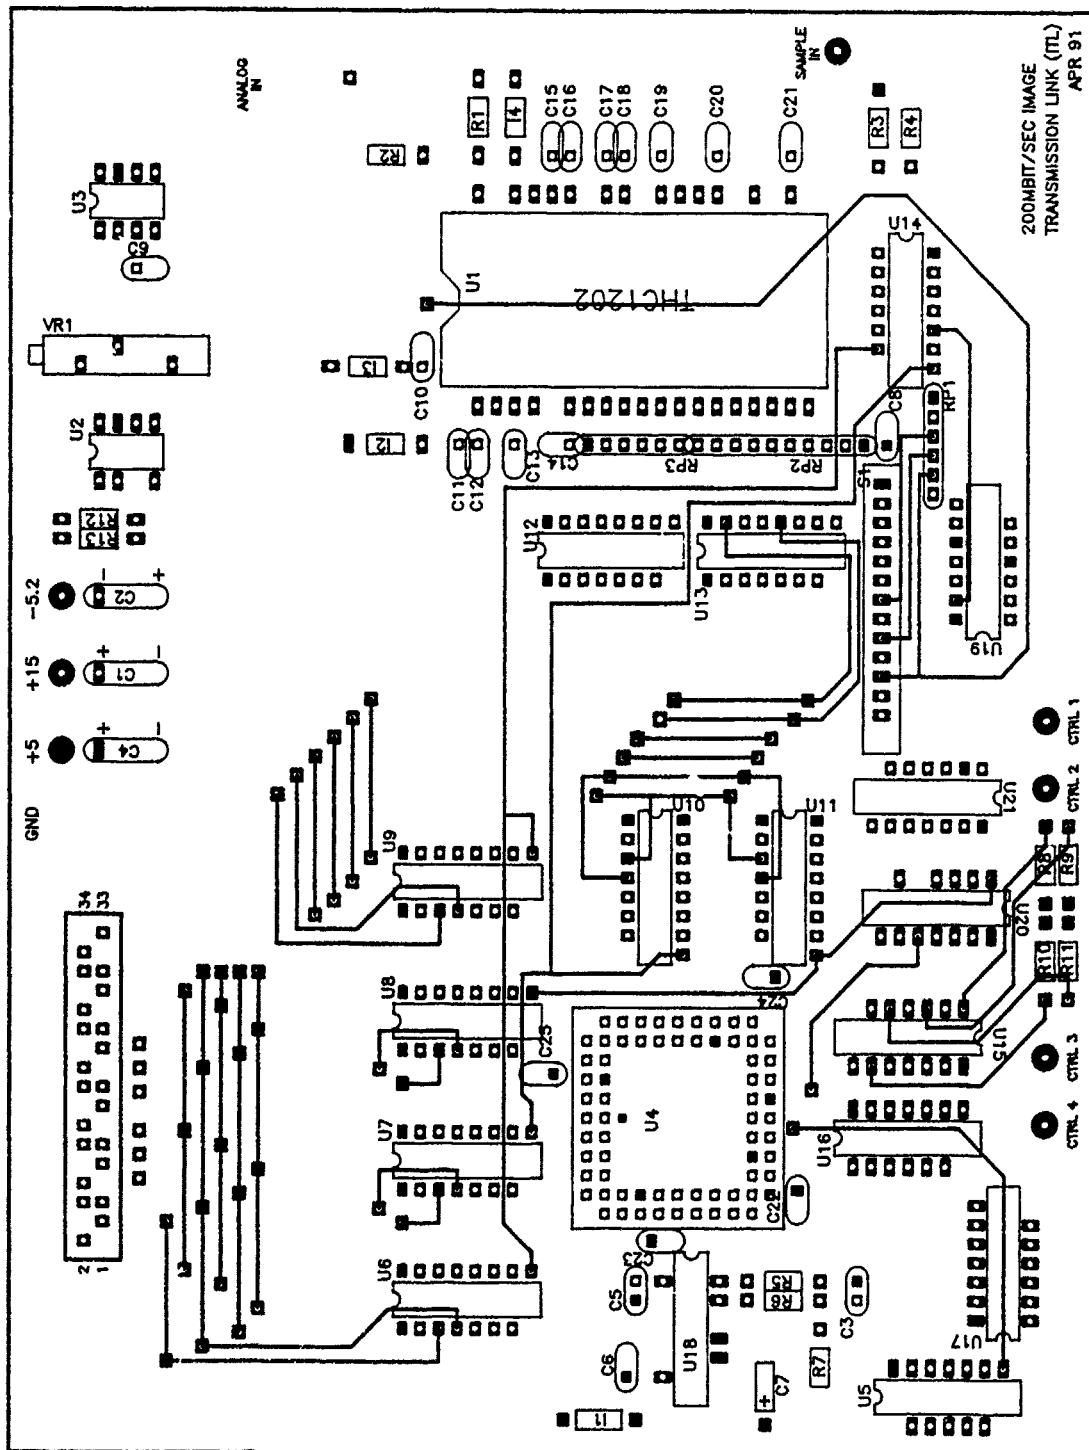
ITL Transmitter Board - PC Board Layout (TOP)
